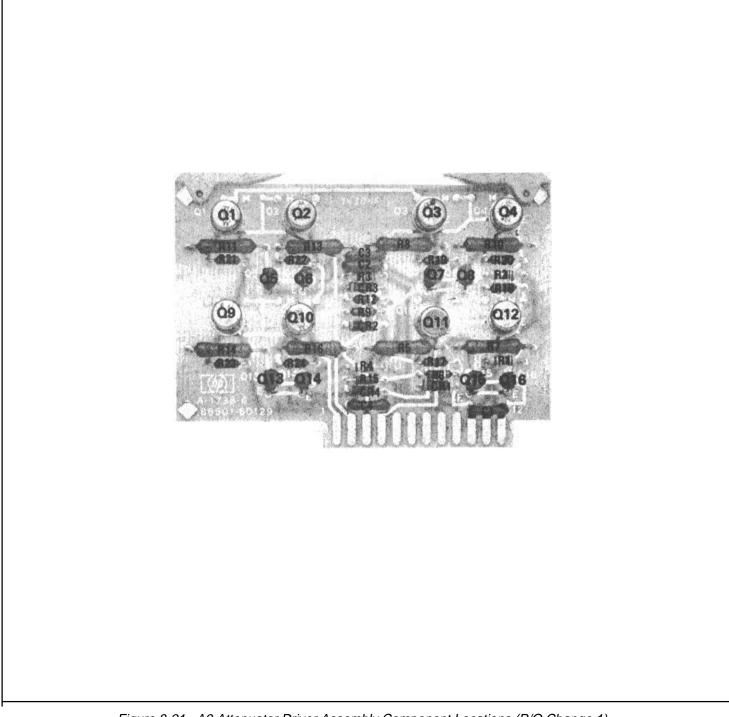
A9 Attenuator Driver Assembly Component Locations (P/O Change 1)
